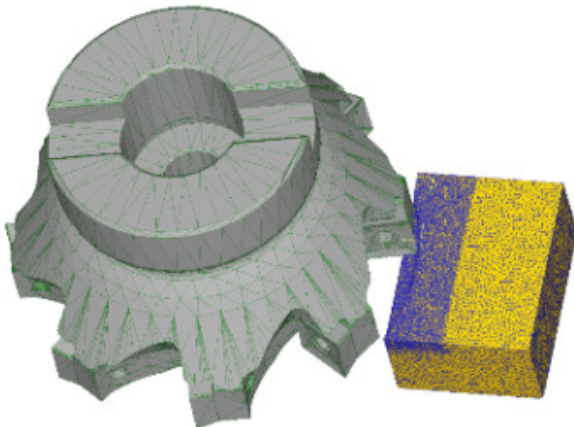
Simulated milling cutter and workpiece using DEFORM-3D.
